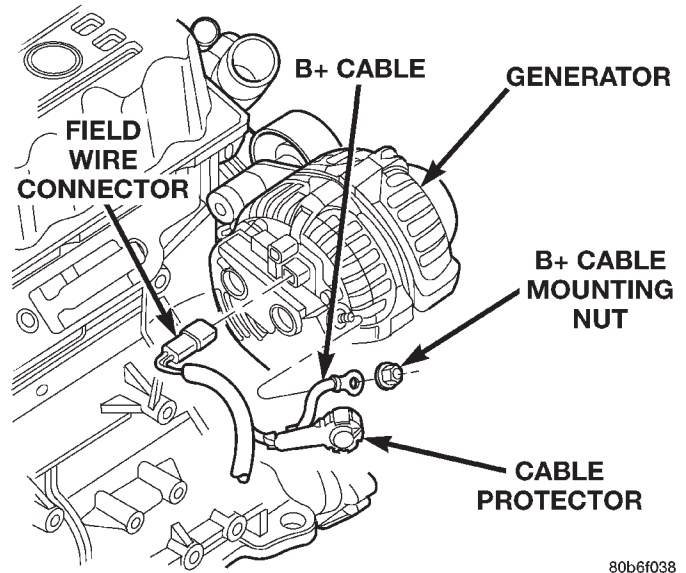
Generator B+ Cable and Field Wire Connections (Typical—4.0L Engine Shown)
